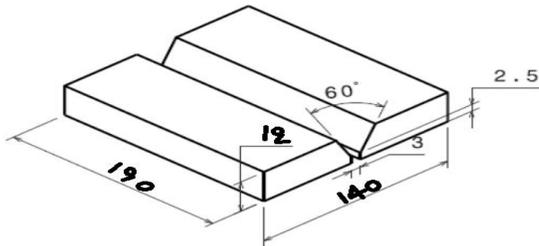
Dimensions of single ‘V’ butt joint configuration (mm)
